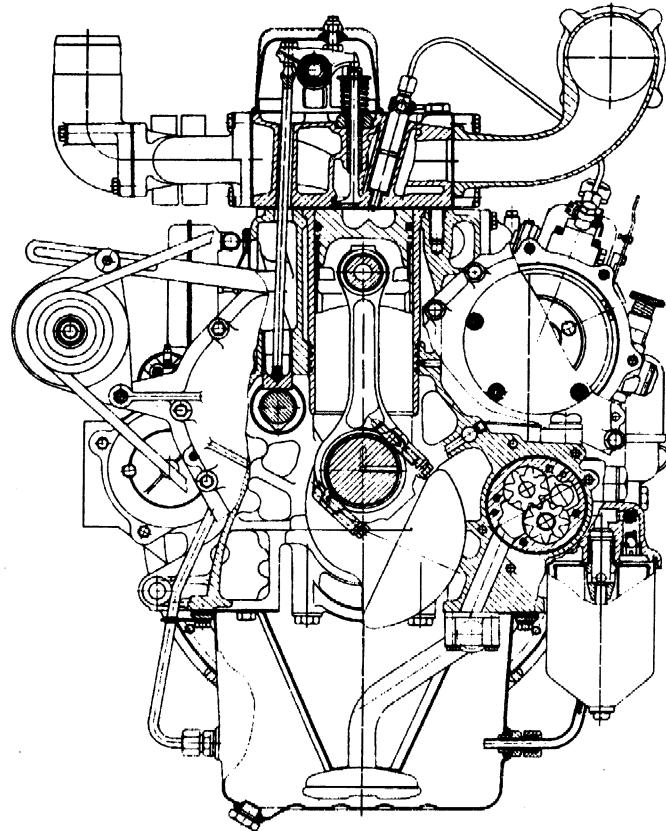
Cross sectional drawing for R6100, R6105 diesel engine
